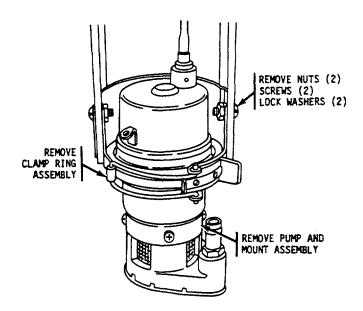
Electric fuel pump and mount assembly-disassembly and assembly (Sheet 1 of 2).
